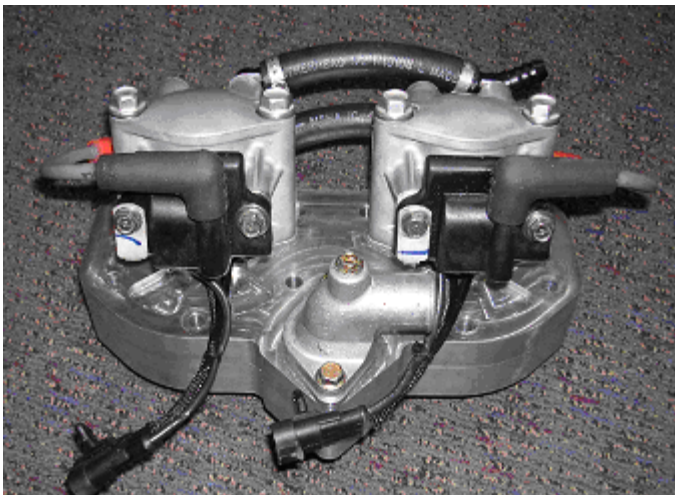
Completed UICSC GDI head with the injector/coil assemblies.
